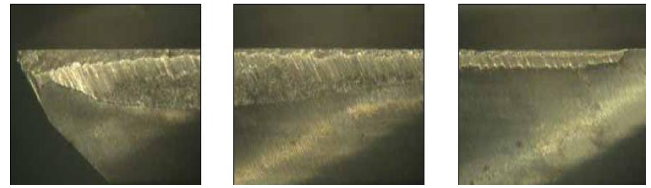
AlTiN monolayer gradient coating tool edge wear morphology.
